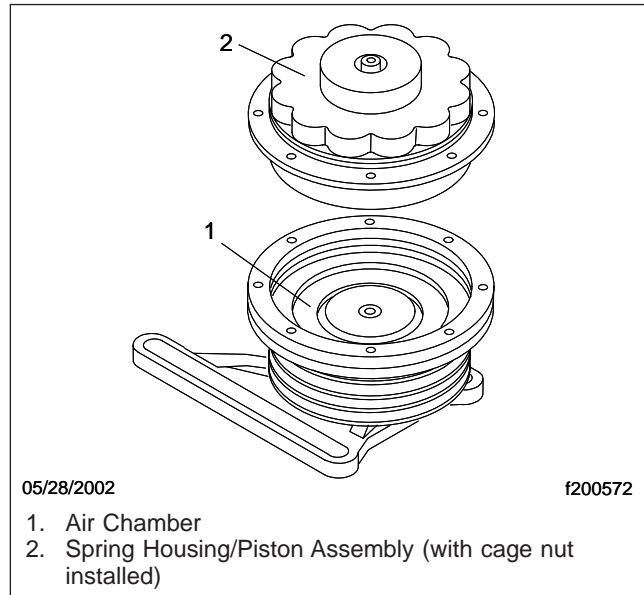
, Spring Housing/Piston Assembly Removal and Installation
